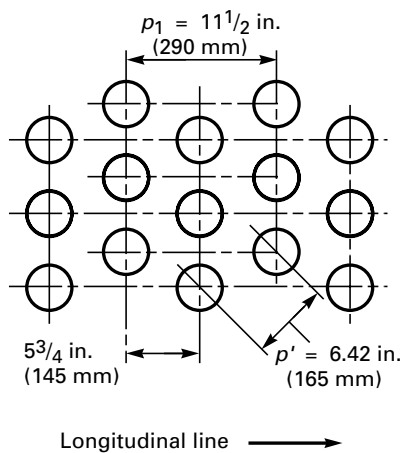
EXAMPLE OF TUBE SPACING WITH TUBE HOLES ON DIAGONAL LINES
